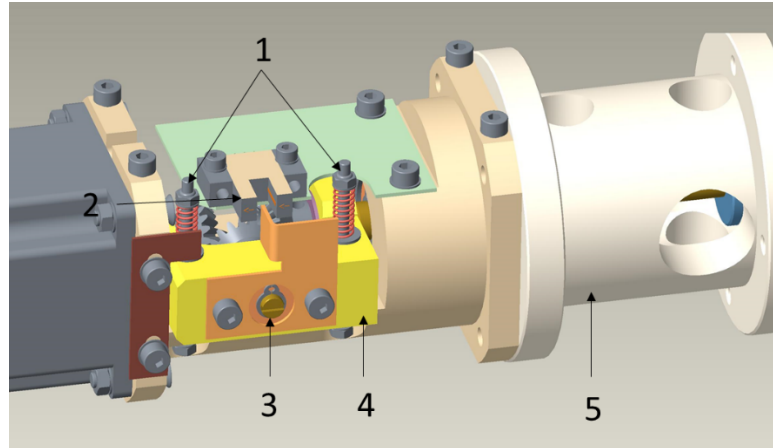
Valve drive for Hg Source with outer cover removed, parts labeled: 1. Adjustment springs for torque limiter, 2. Optical switch, 3. Manual valve screw (C/W close) 4. Torque limiter swing ,6. Thermal insulator connection to Hg source.
